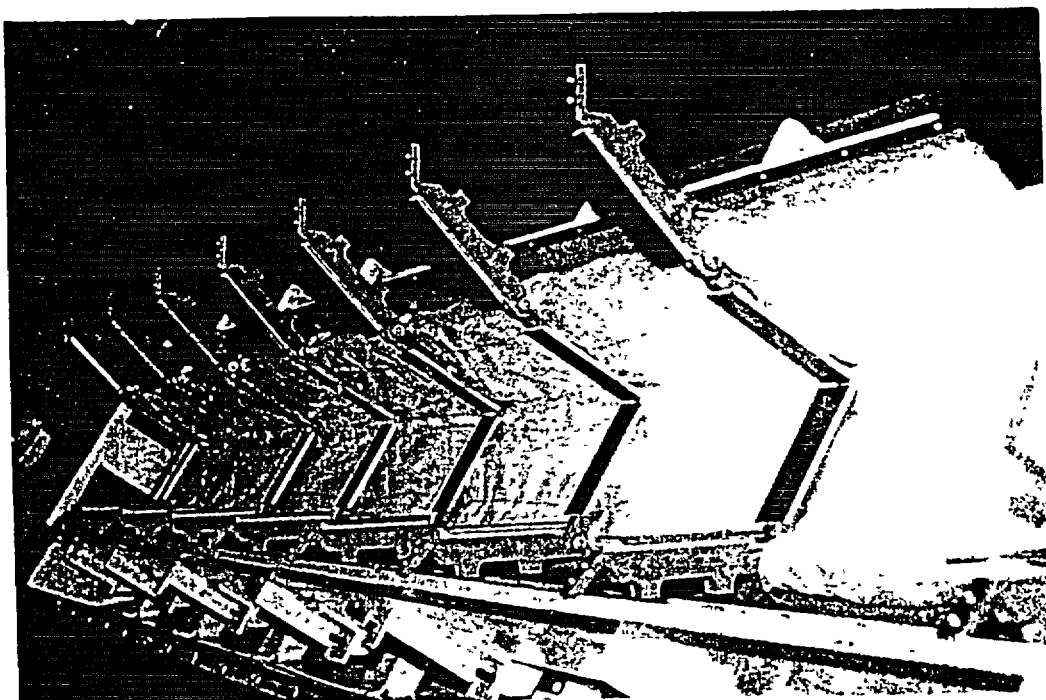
Strongback in Position for Fuel Assembly Loading
